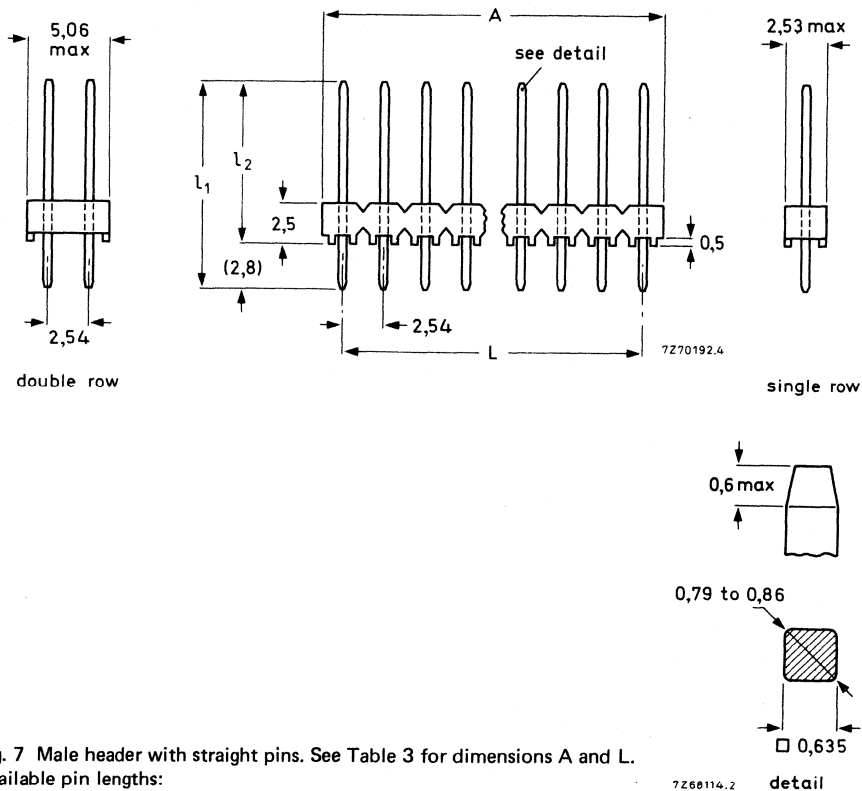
Male header with straight pins. See Table 3 for dimensions A and L.
